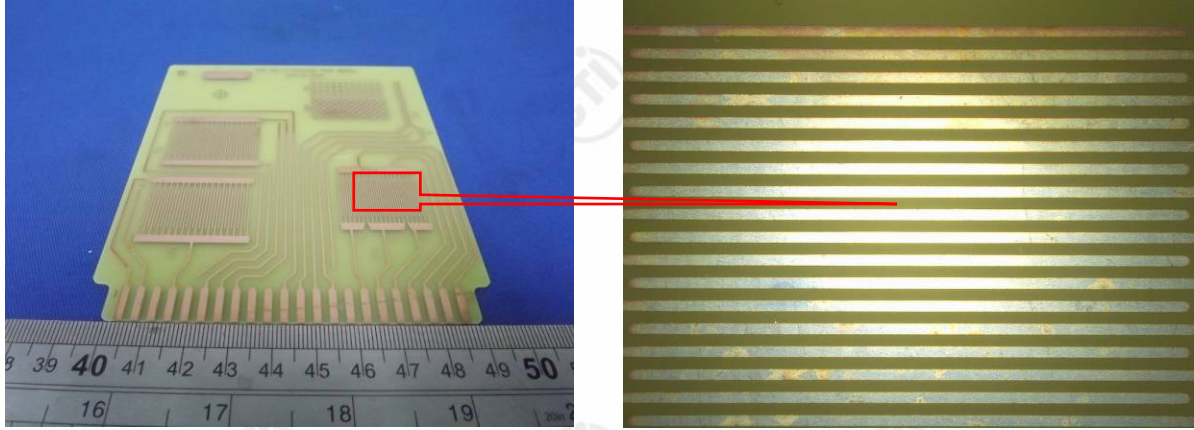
Sample PA120510012-2 test board 3 photo after test
